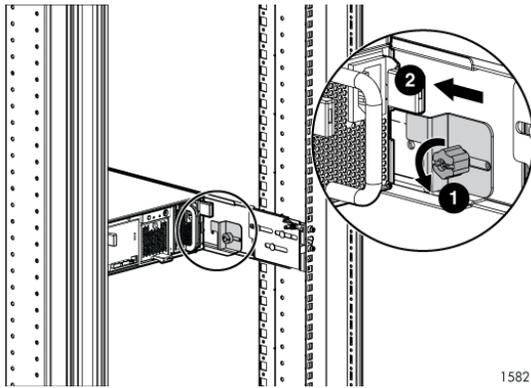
Securing the rear of the enclosure (view from rear of rack)
